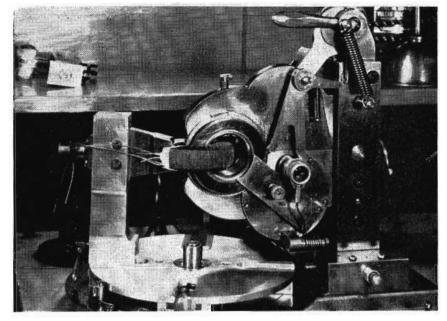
Multilayer winding machine for making small toroidal inductors and transformers
